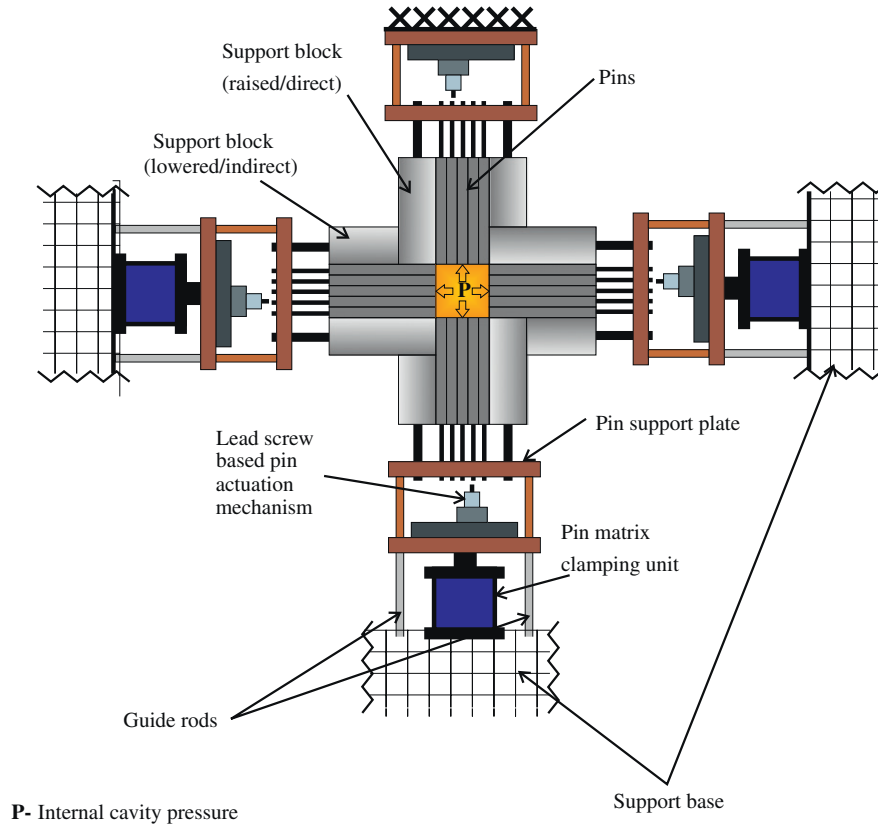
Cross-sectional view of the reconfigurable mold tool system.
